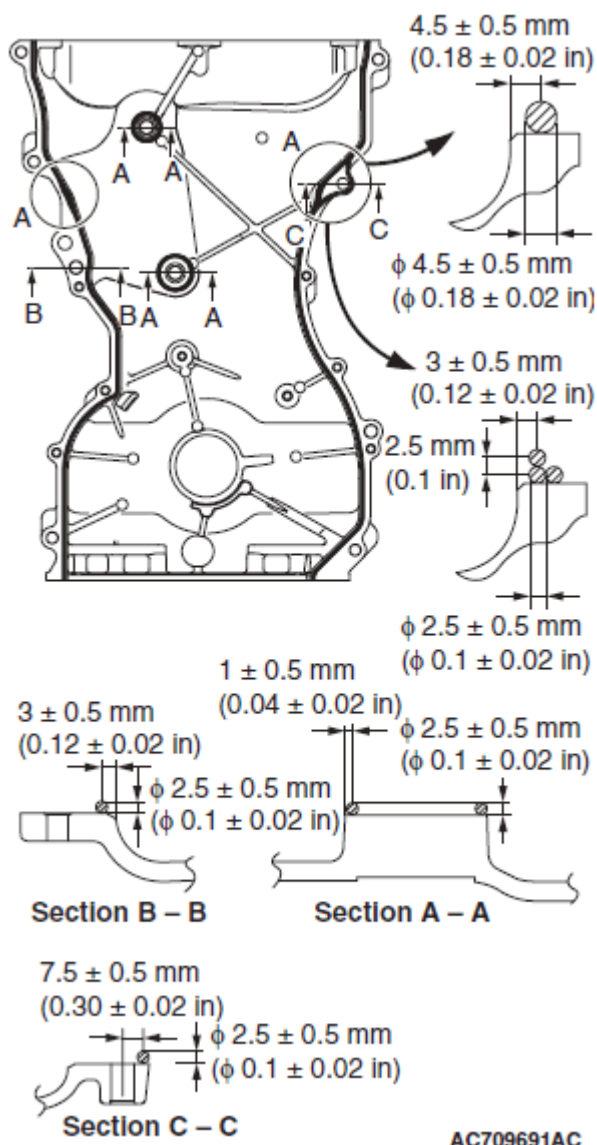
Identifying Timing Chain Case Assembly To Sealant Applying Area
